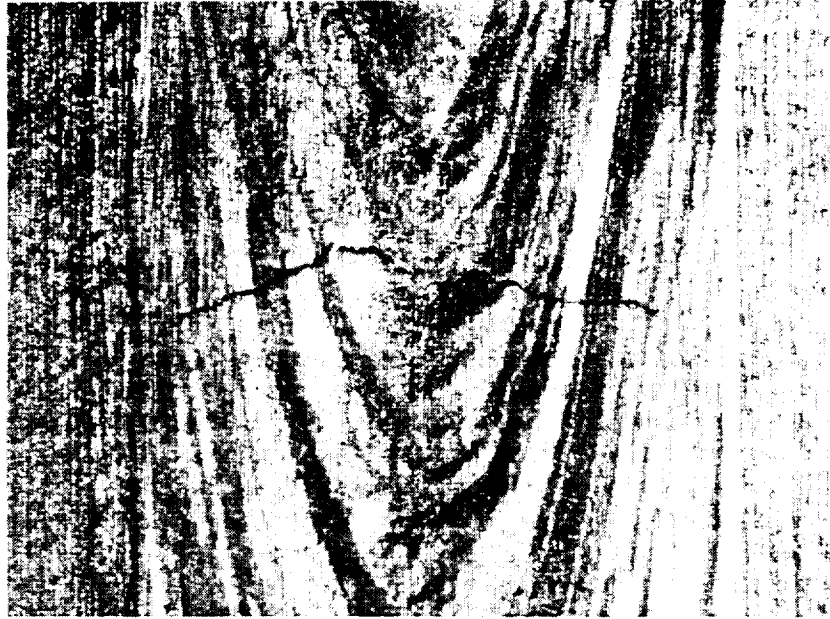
Photograph of Top Surface of Weld From Panel Produced During Reproducibility Study Showing Representative Crack in Weld (Photograph at approximately 20X magnification).
